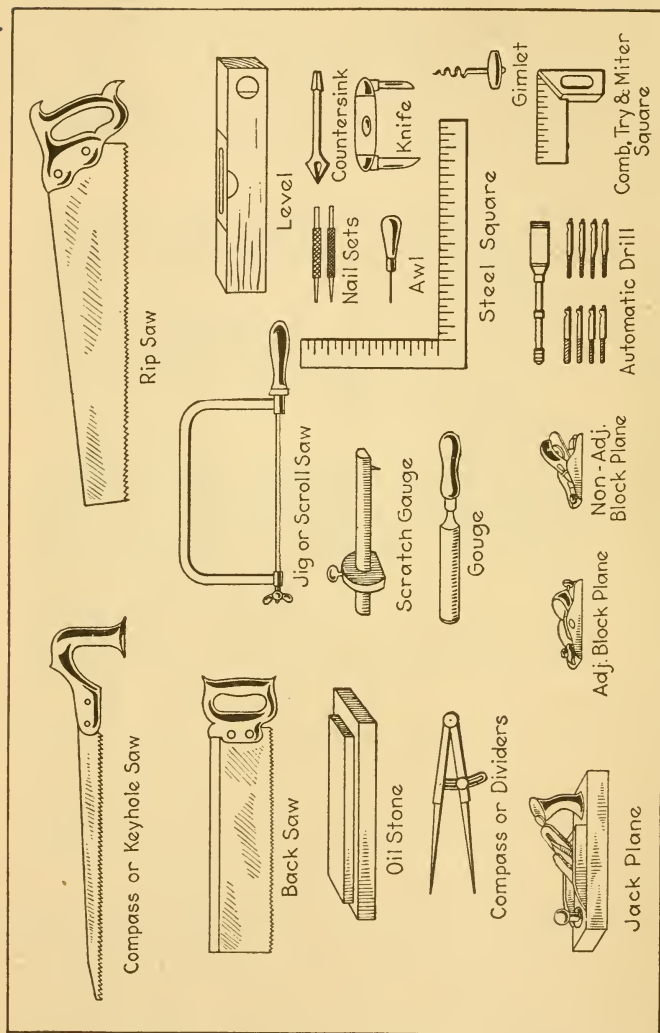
Tools That Can Be Used to Supplement Simple Outfit Shown in Fig. 13.
